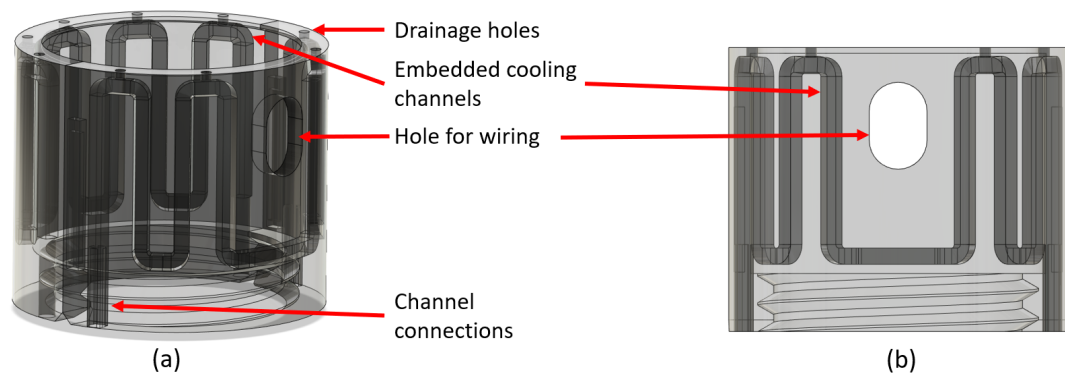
Transducer housing with cooling channels embedded. (a) full housing showing cooling channels for front and rear semi-cylinders, (b) front semi-cylinder with wiring hole.
